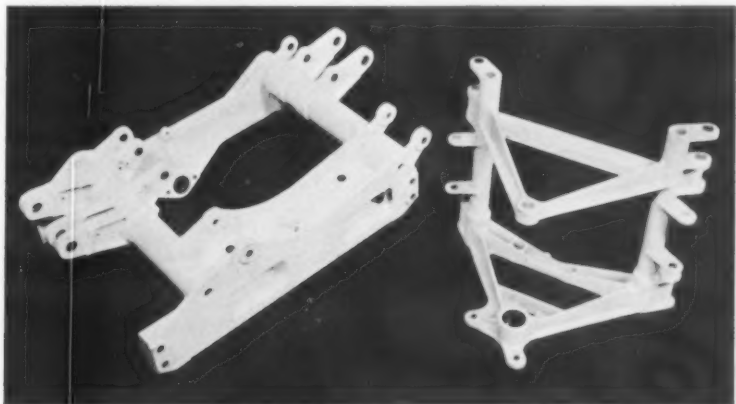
Shell mold type 410 steel casting in interceptor airplane.
